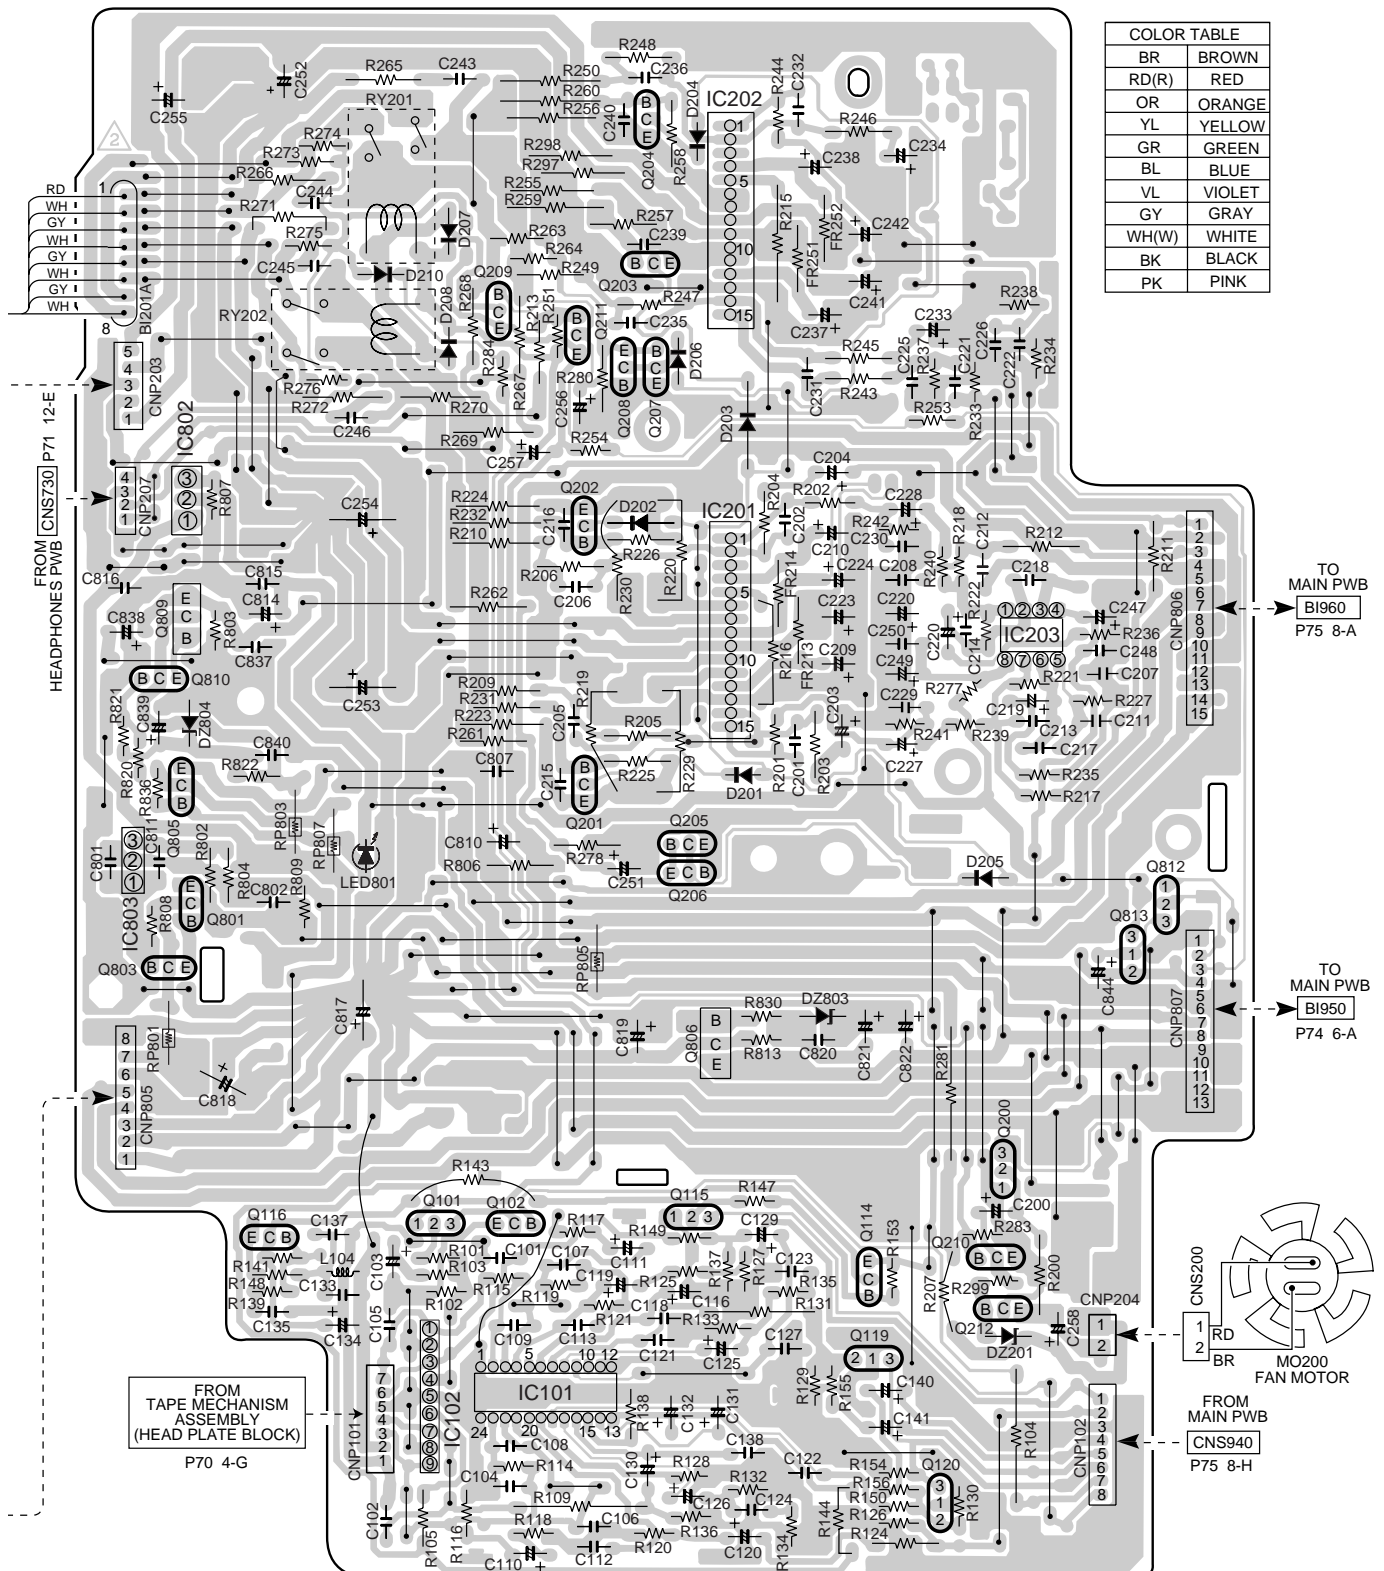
WIRING SIDE OF P.W.BOARD (10/14)
